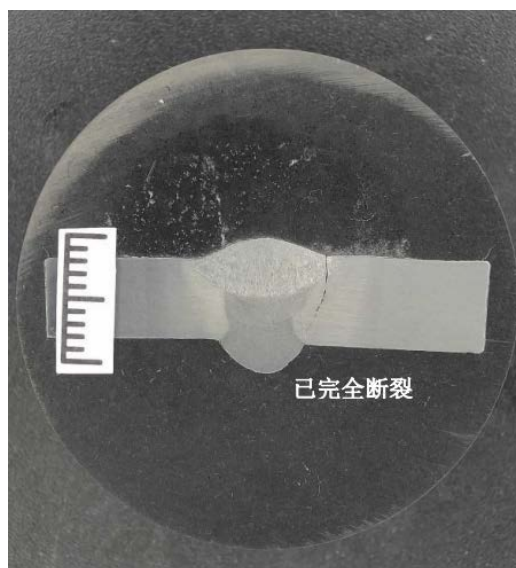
The macroscopic feature of the corrosion gas tubulation's welding line
